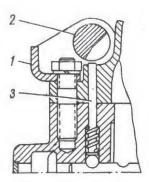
SETTING OF INTER-LOCKING MECHANISM SHAFT (POSITION WITH CLUTCH PEDAL DEPRESSED) 1 - shaft bracket; 2 - shaft; 3 - interlocking pin
